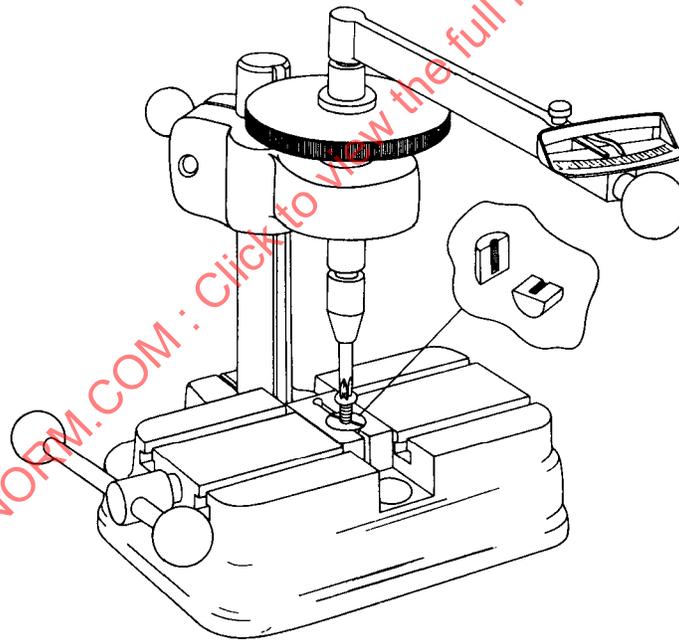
TYPICAL TORSIONAL STRENGTH TEST FIXTURE
